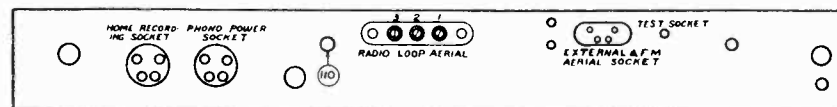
TERMINAL AND SOCKET LOCATIONS, REAR OF CHASSIS
